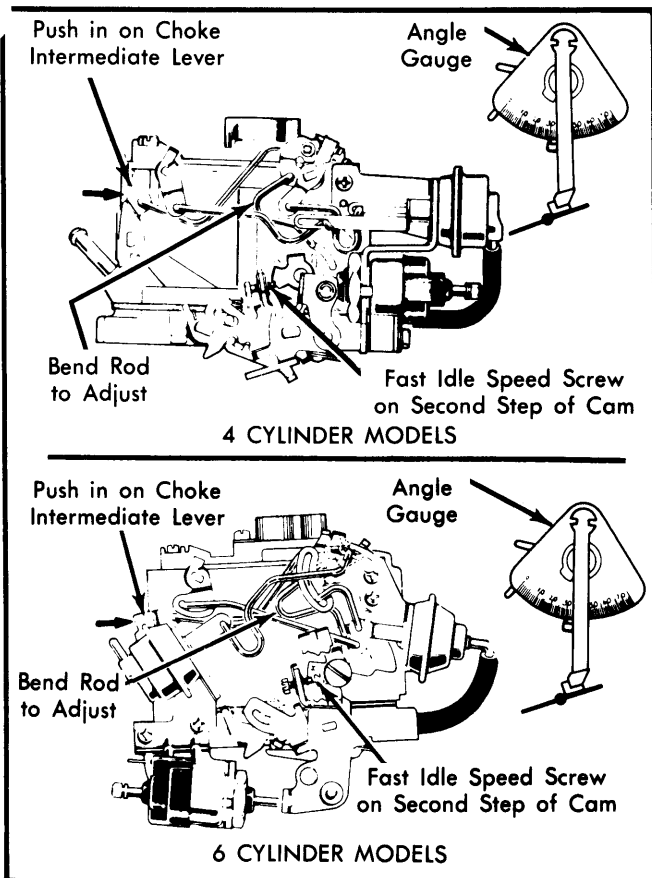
Adjusting Choke Rod (Fast Idle Cam)
